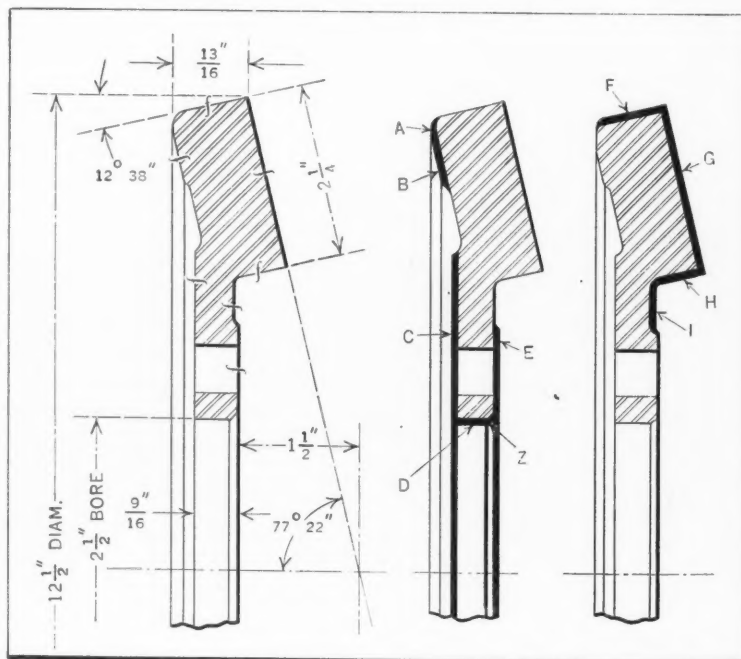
Cross-sections of Tractor Gear Blank, Showing Surfaces to be Machined
